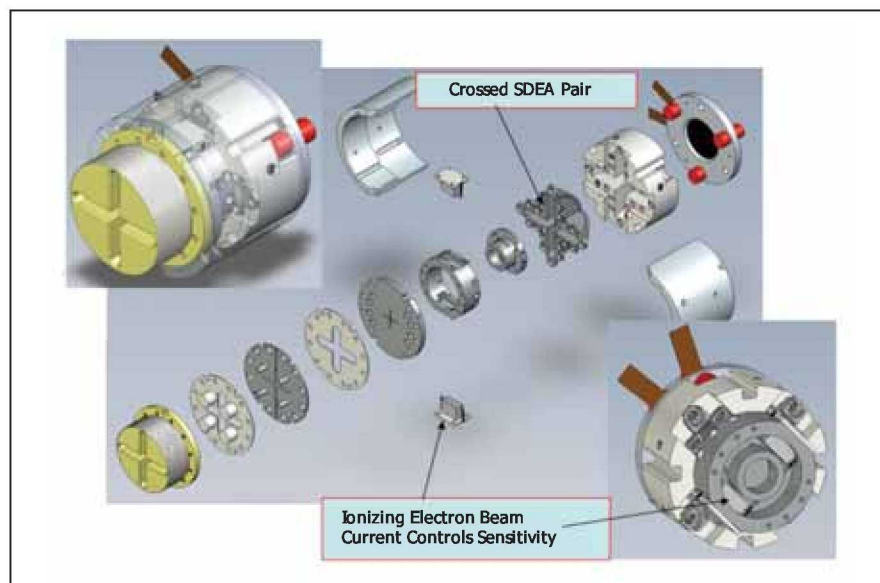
Drawing of the Crossed SDEA WTS assembled and in separate parts.
